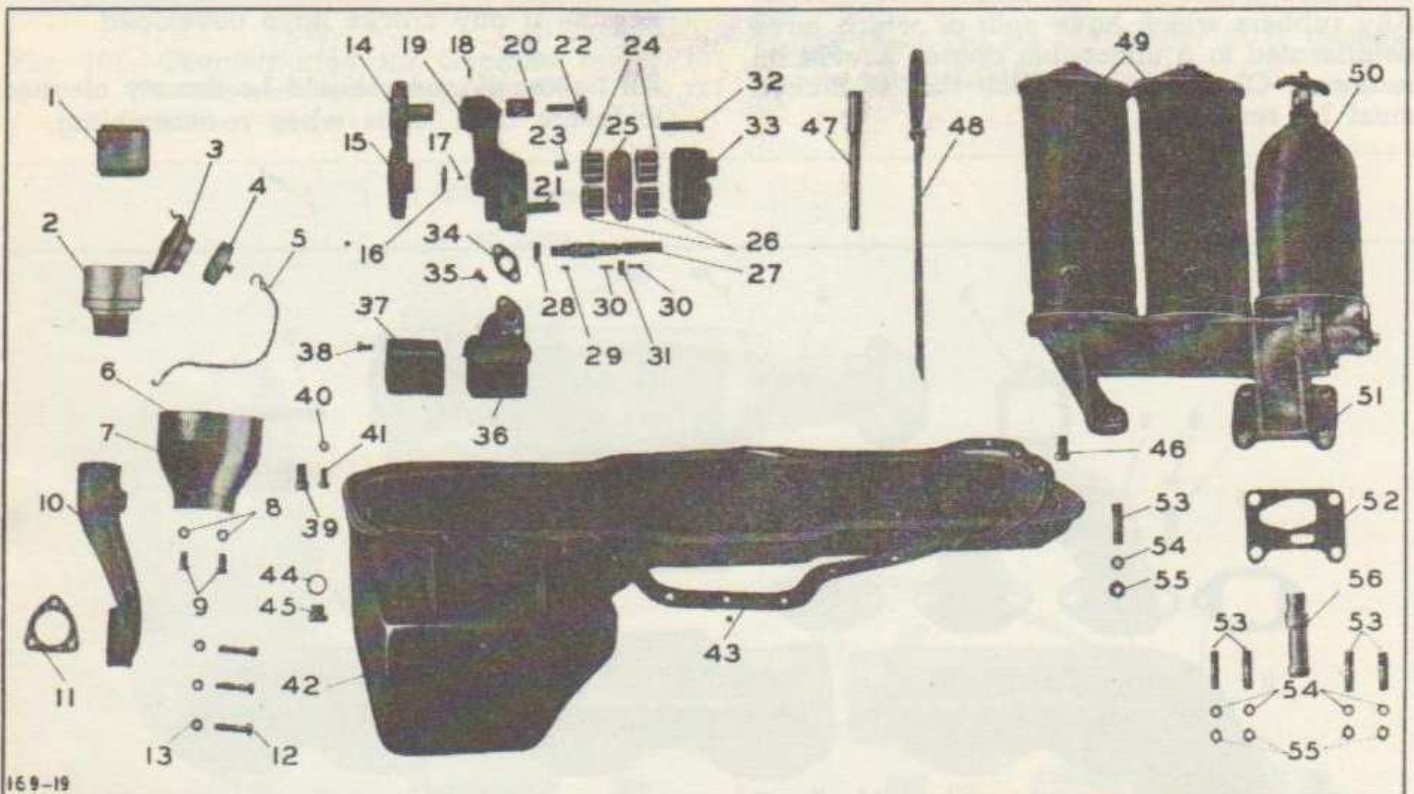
Exploded View of Oil Pump and Oiling System Components
